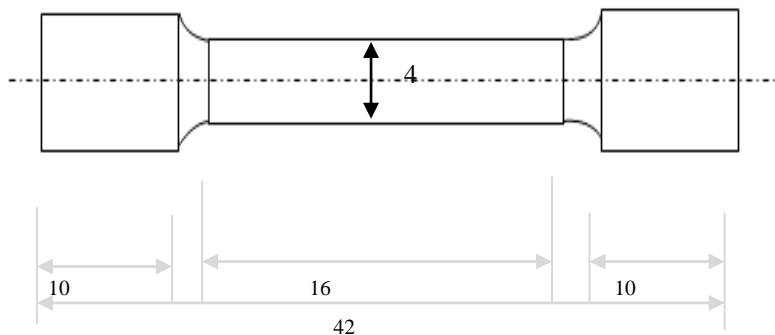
Tensile specimen specifications (all dimensions are in mm)
